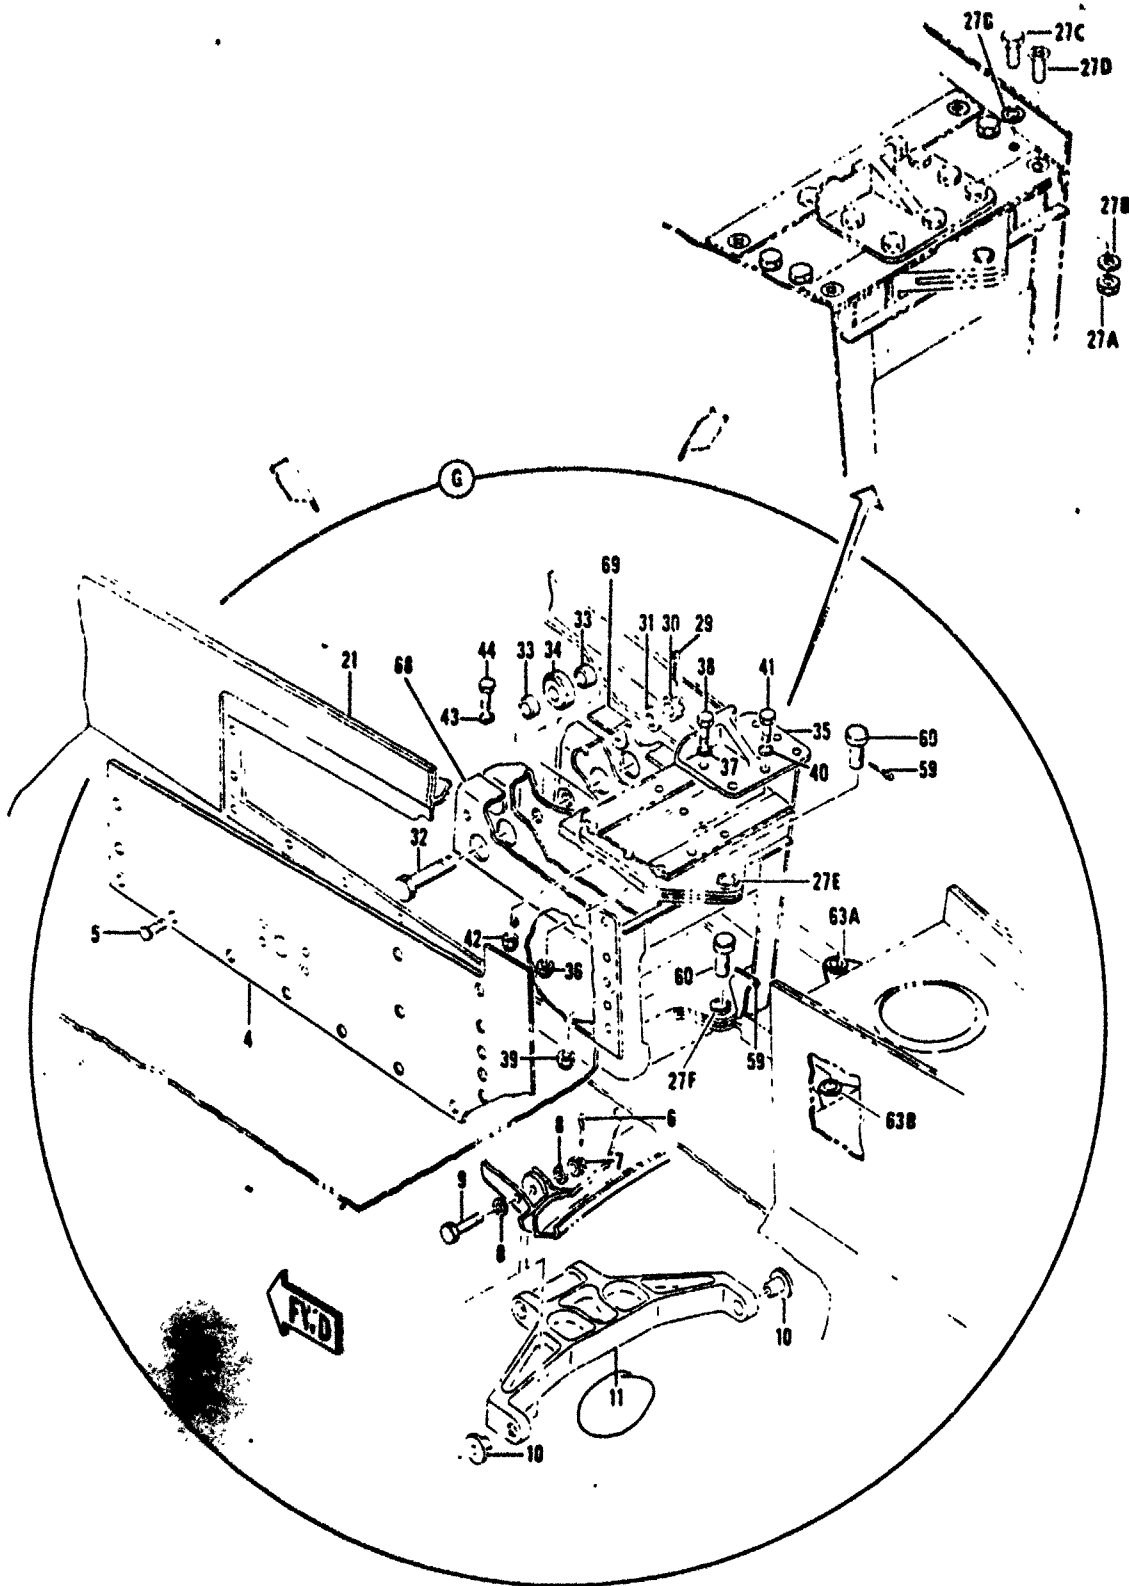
Aft Thrust Reverser and Sleeve Assembly (Sheet 3 of 3)
